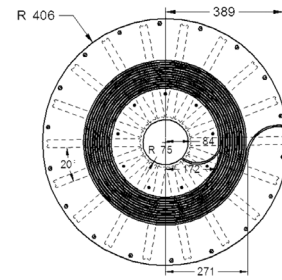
Dimension of a circular coil with ferrite pads [109].
